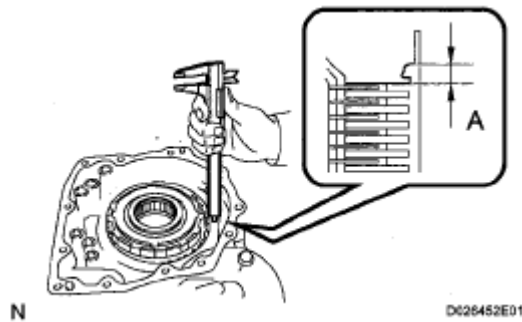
Measuring Distance Between Disc/Contact Surface Of 2nd Brake Cylinder And Transaxle Case
